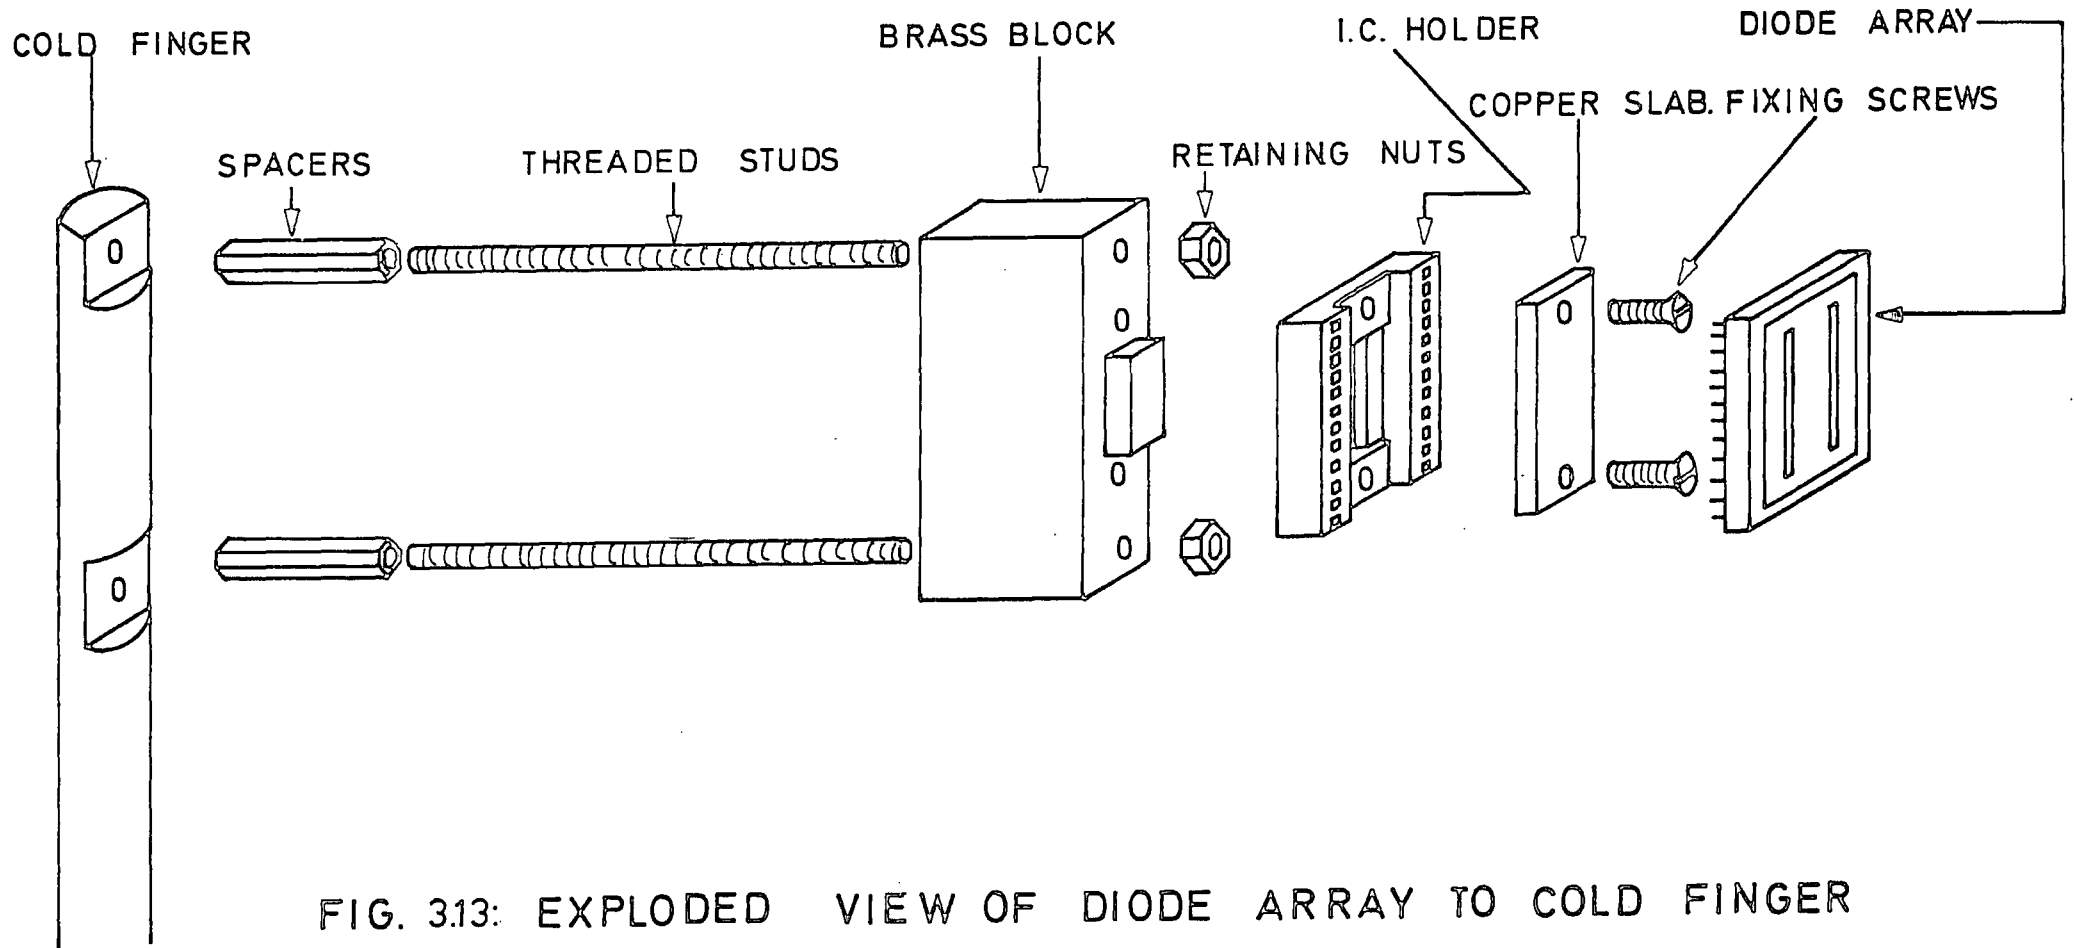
EXPLODED VIEW OF DIODE ARRAY TO COLD FINGER MOUNTING
